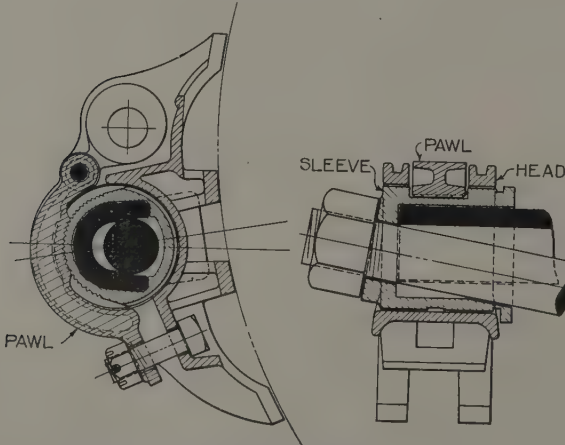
Semi-Adjustable Head for Creco Brake Beam. Chicago Railway Equipment Company.
